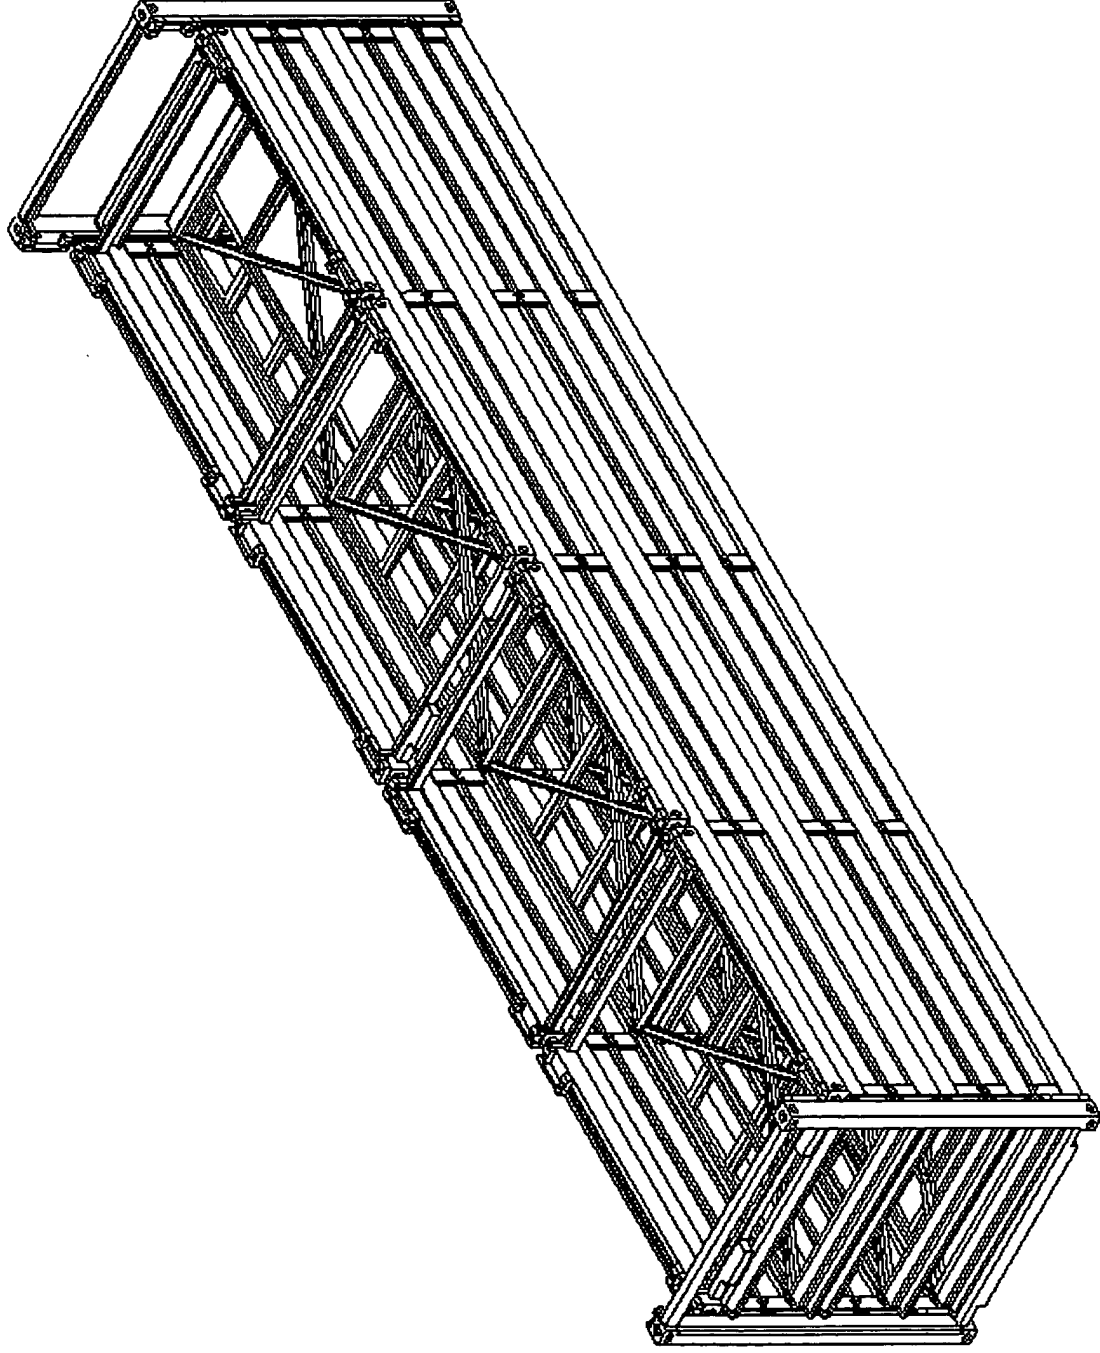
B: Step6 of disassemble and load process: The right frame of the shipping collapsible cargo container is assembled.
